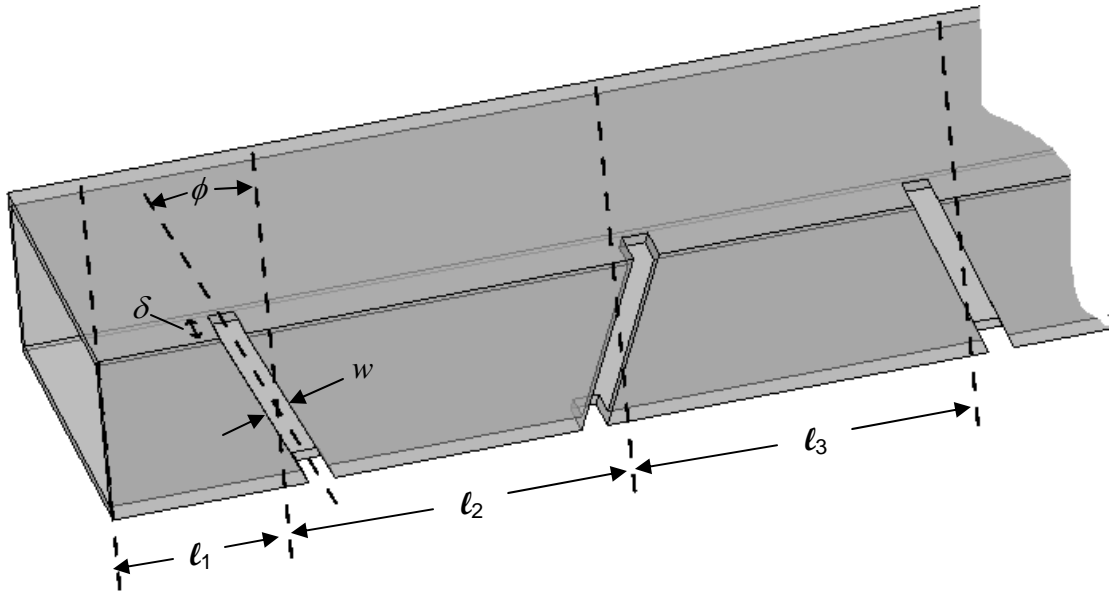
Waveguide edge slot radiator dimensions of interest in tolerance analysis
